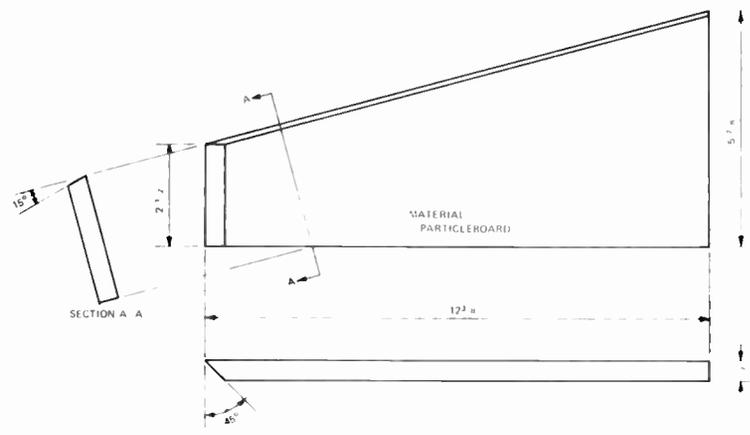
Cabinet sides — two required. Note that boards should be mirror image of each other, that is, chamfers should have opposite slope.
